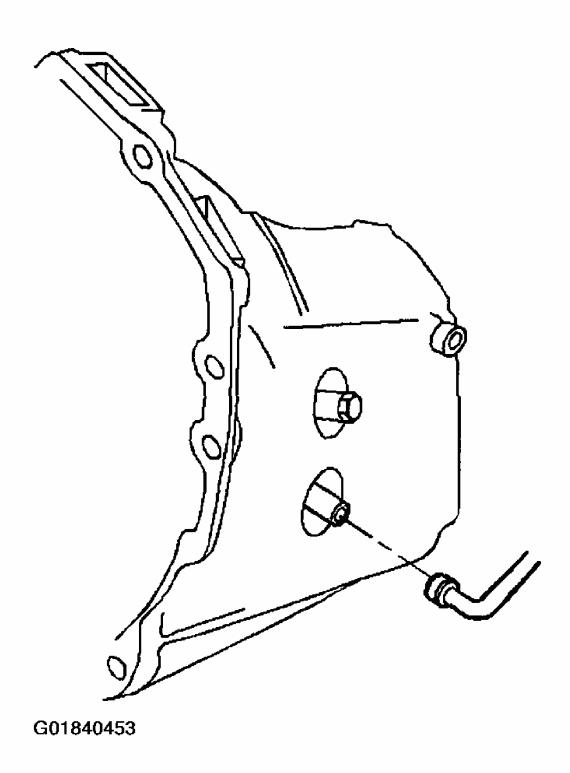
Separating Concentric Slave Cylinder Hydraulic Clutch Line Quick Connect
